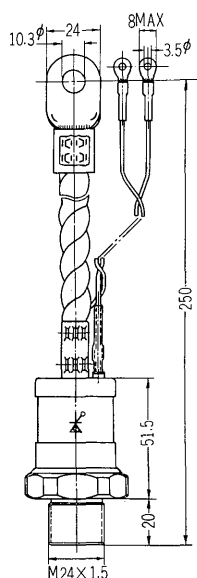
Dimensions of thyristors GTN01, GTN02 and GTN21
